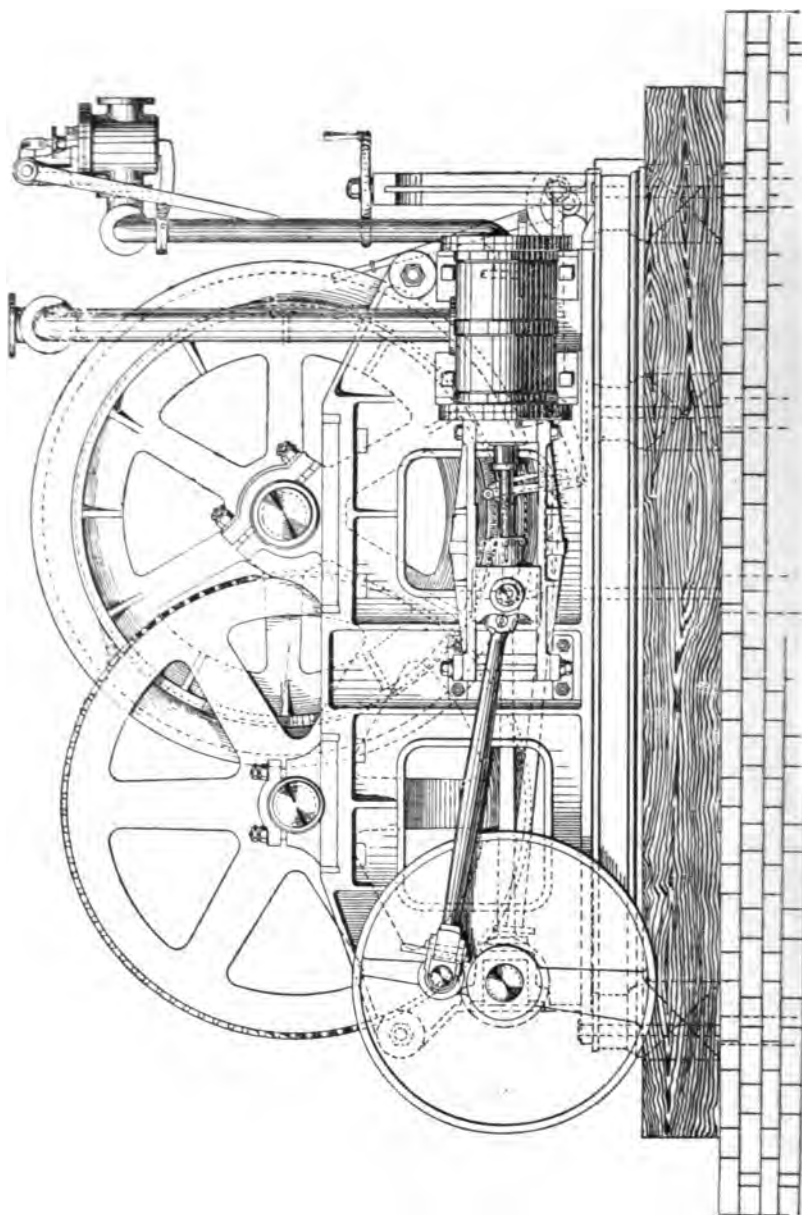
ELEVATION OF CAPTAIN ENGINE.
